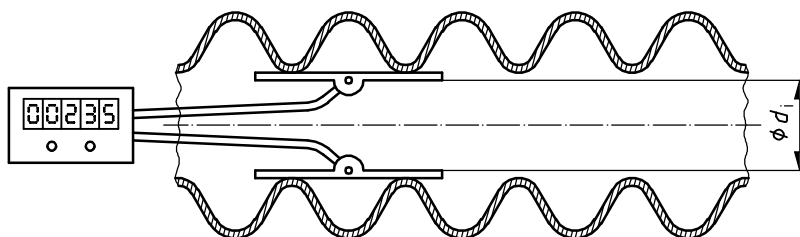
Example of device for measuring inside diameter of corrugated pipe
